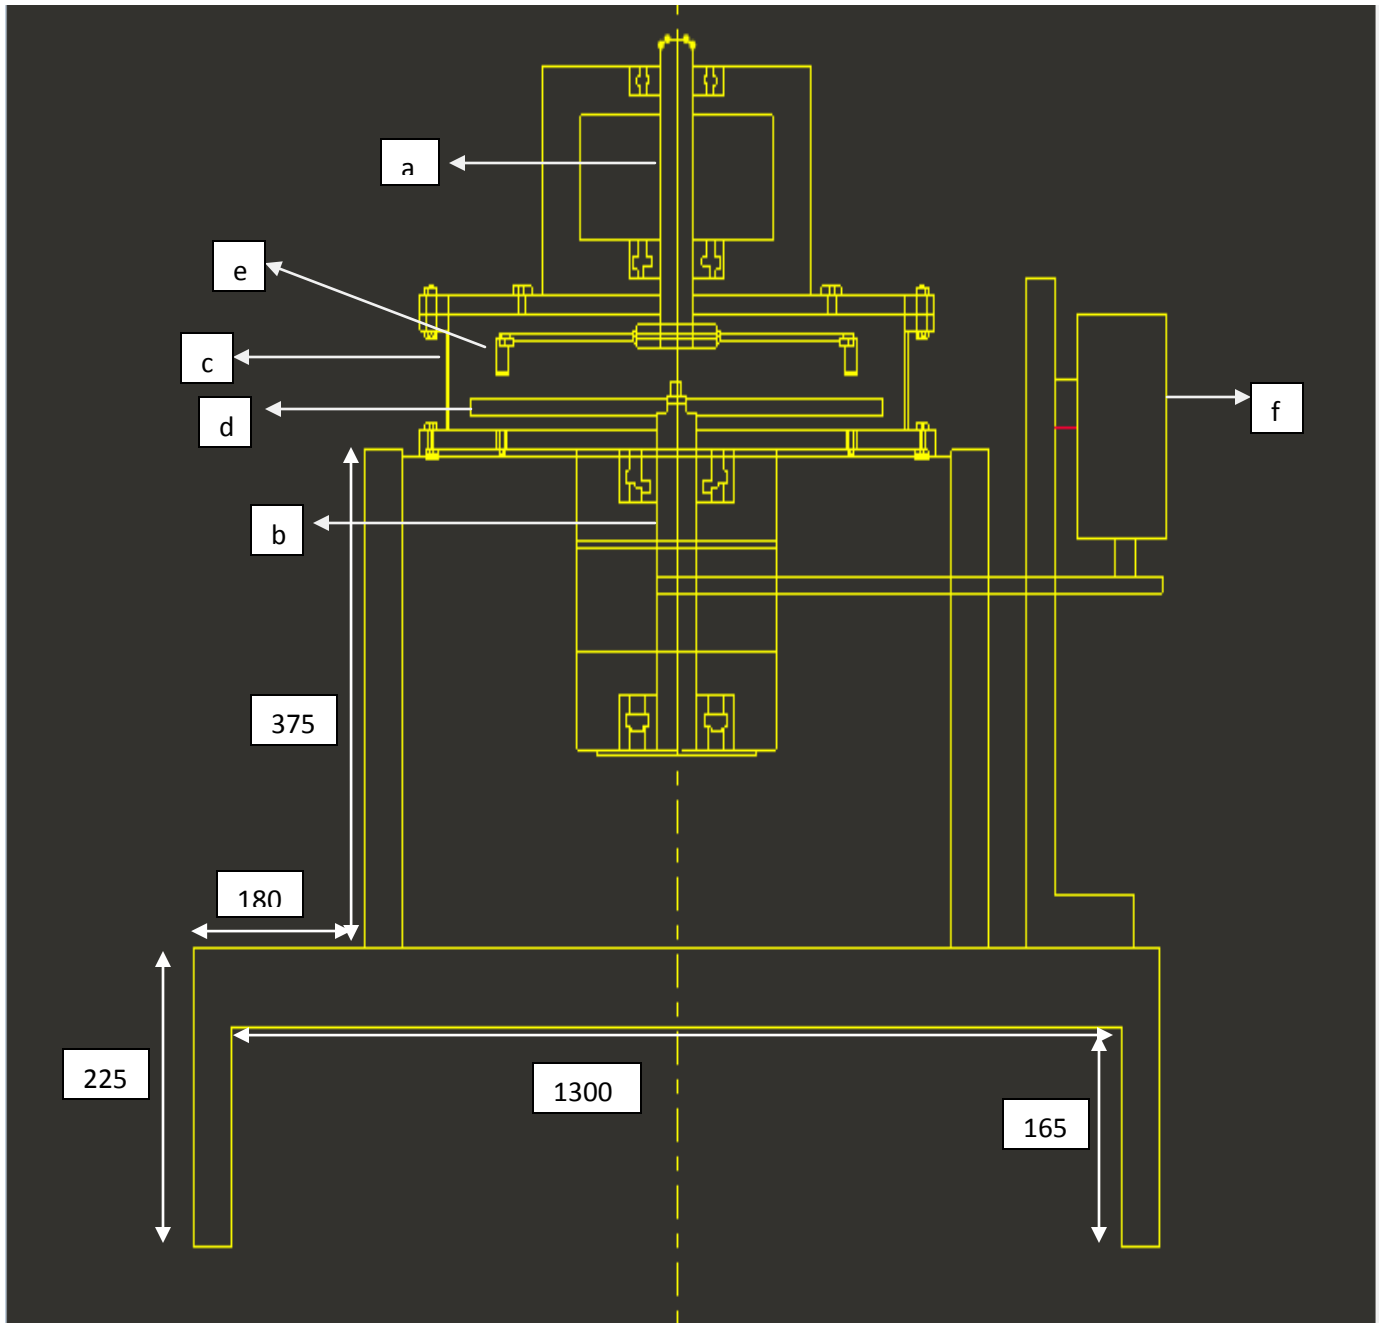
Schematic representation of erosion pot tester. (a) Upper shaft (b) lower shaft (c) cylindrical tank (d) propeller (e) wear specimens (f) DC motor. (All dimensions in mm)
